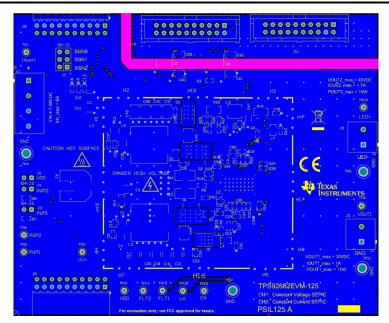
TPS92682EVM-125 Bottom Layer (Bottom View)
